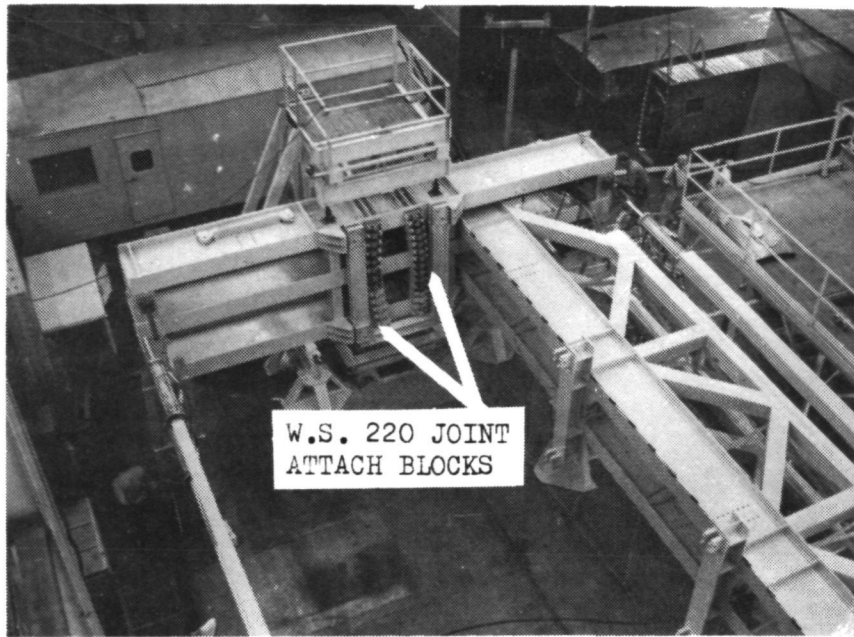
PHOTOGRAPH OF TEST FIXTURE SHOWING SIMULATED OUTER WING FITTING ATTACHED TO ONE END-LOADER
